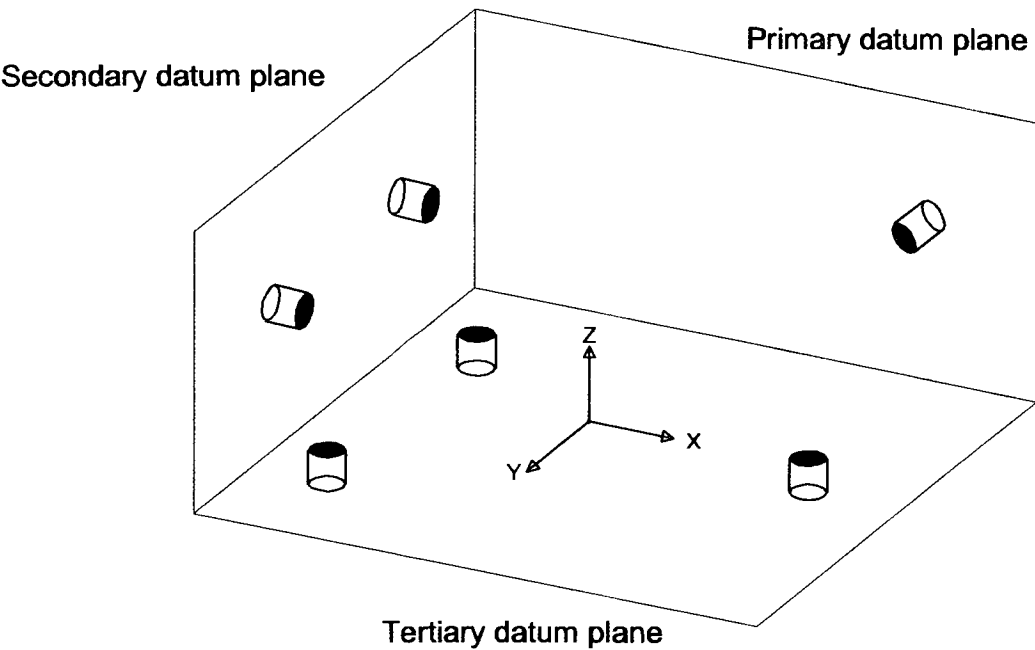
The 3:2:1 locating principles for a prismatic workpiece.
